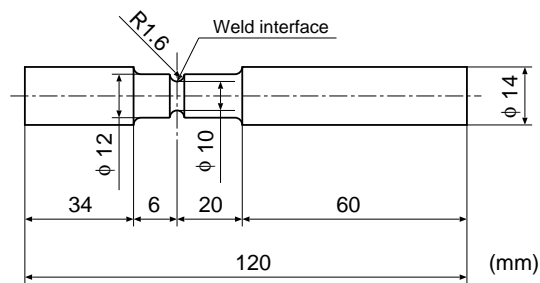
Shape and dimensions of fatigue test specimen.
